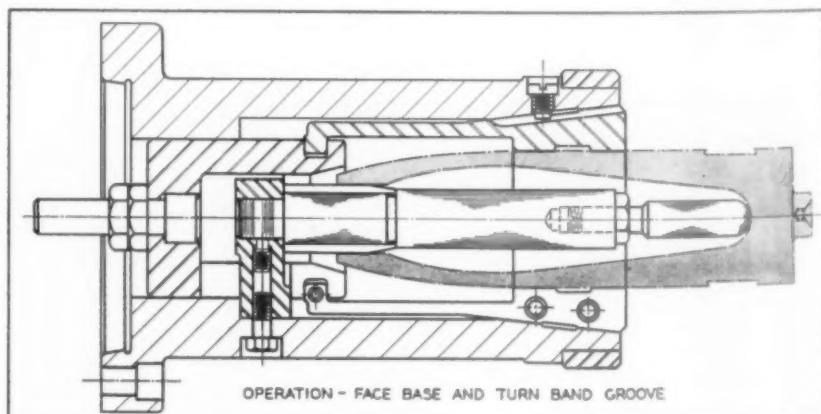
For the operations on the base of the shell, the shell is located against the end of an adjustable male locator and the fuse recess is piloted on a hardened tapered bushing.
